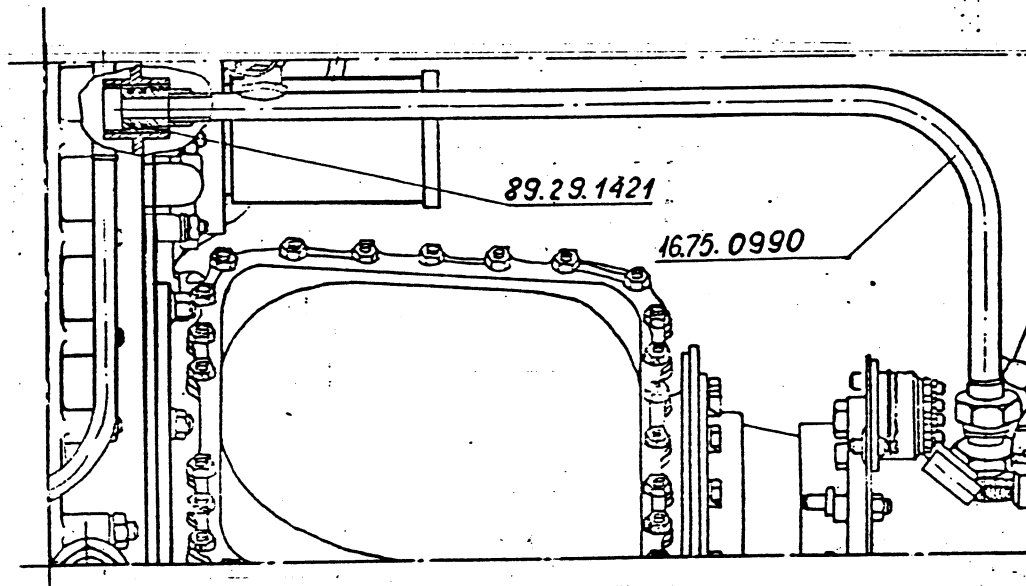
Vent pipe 16.75.0990 of the III bearing assembly.
